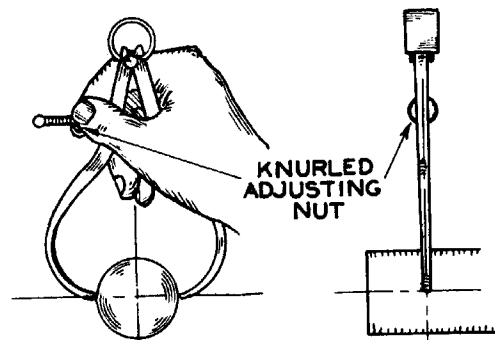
TAKING A MEASUREMENT WITH AN OUTSIDE CALIPER
